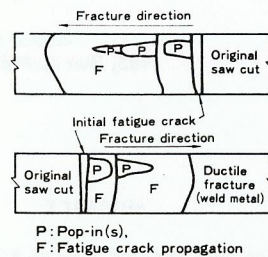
Fracture surface at the both tips of original crack for specimen 5SR-3.
